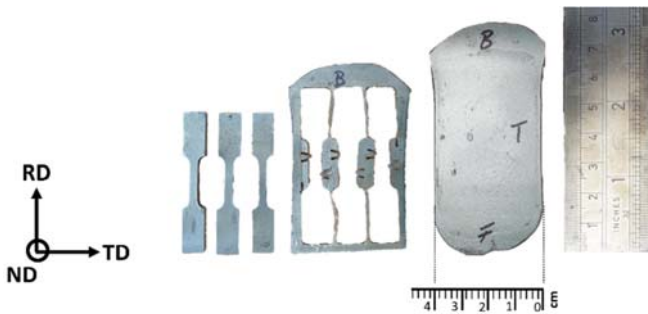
Mini 1 tensile bars (Fig. 4) machined from hot band strip with dimensions 40 (W) x 78 (L) x 3 (T) mm
